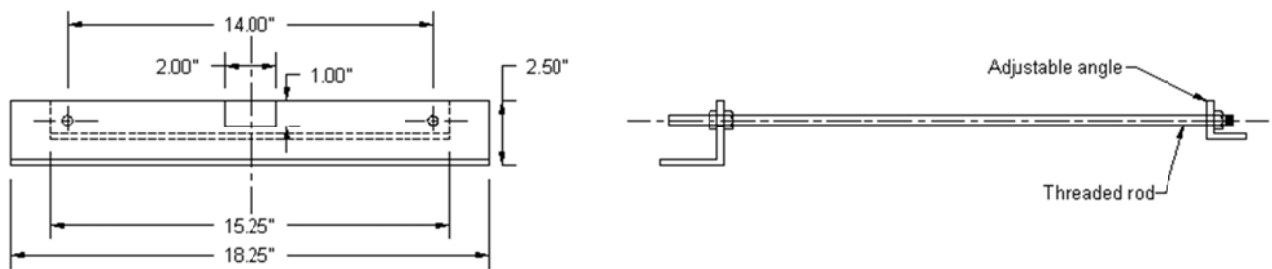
Clamping assembly for parallel flow helium supply plates.
